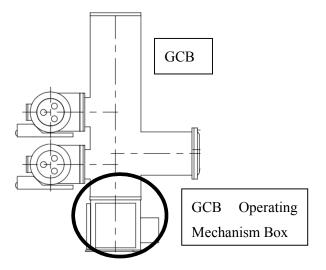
Example of Arrangement of GCB and its Operating Mechanism Box
